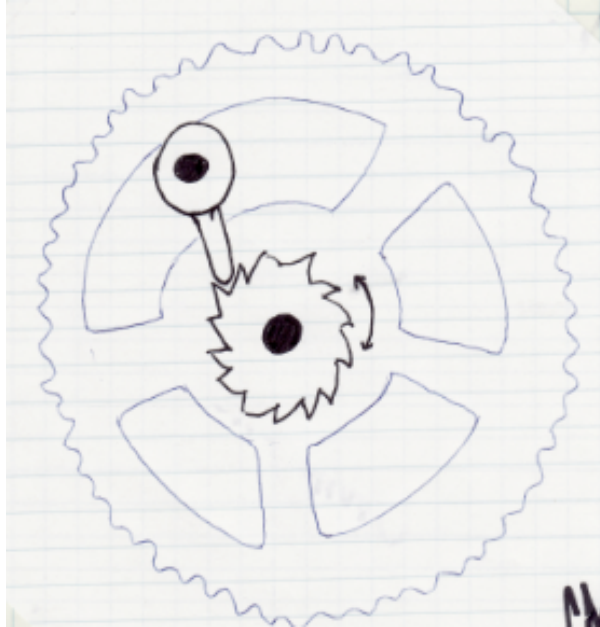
Override- ratchet idea. This part of the design would have a ratchet attached to a gear that is easier to override than the ratchet in Figure 33.
